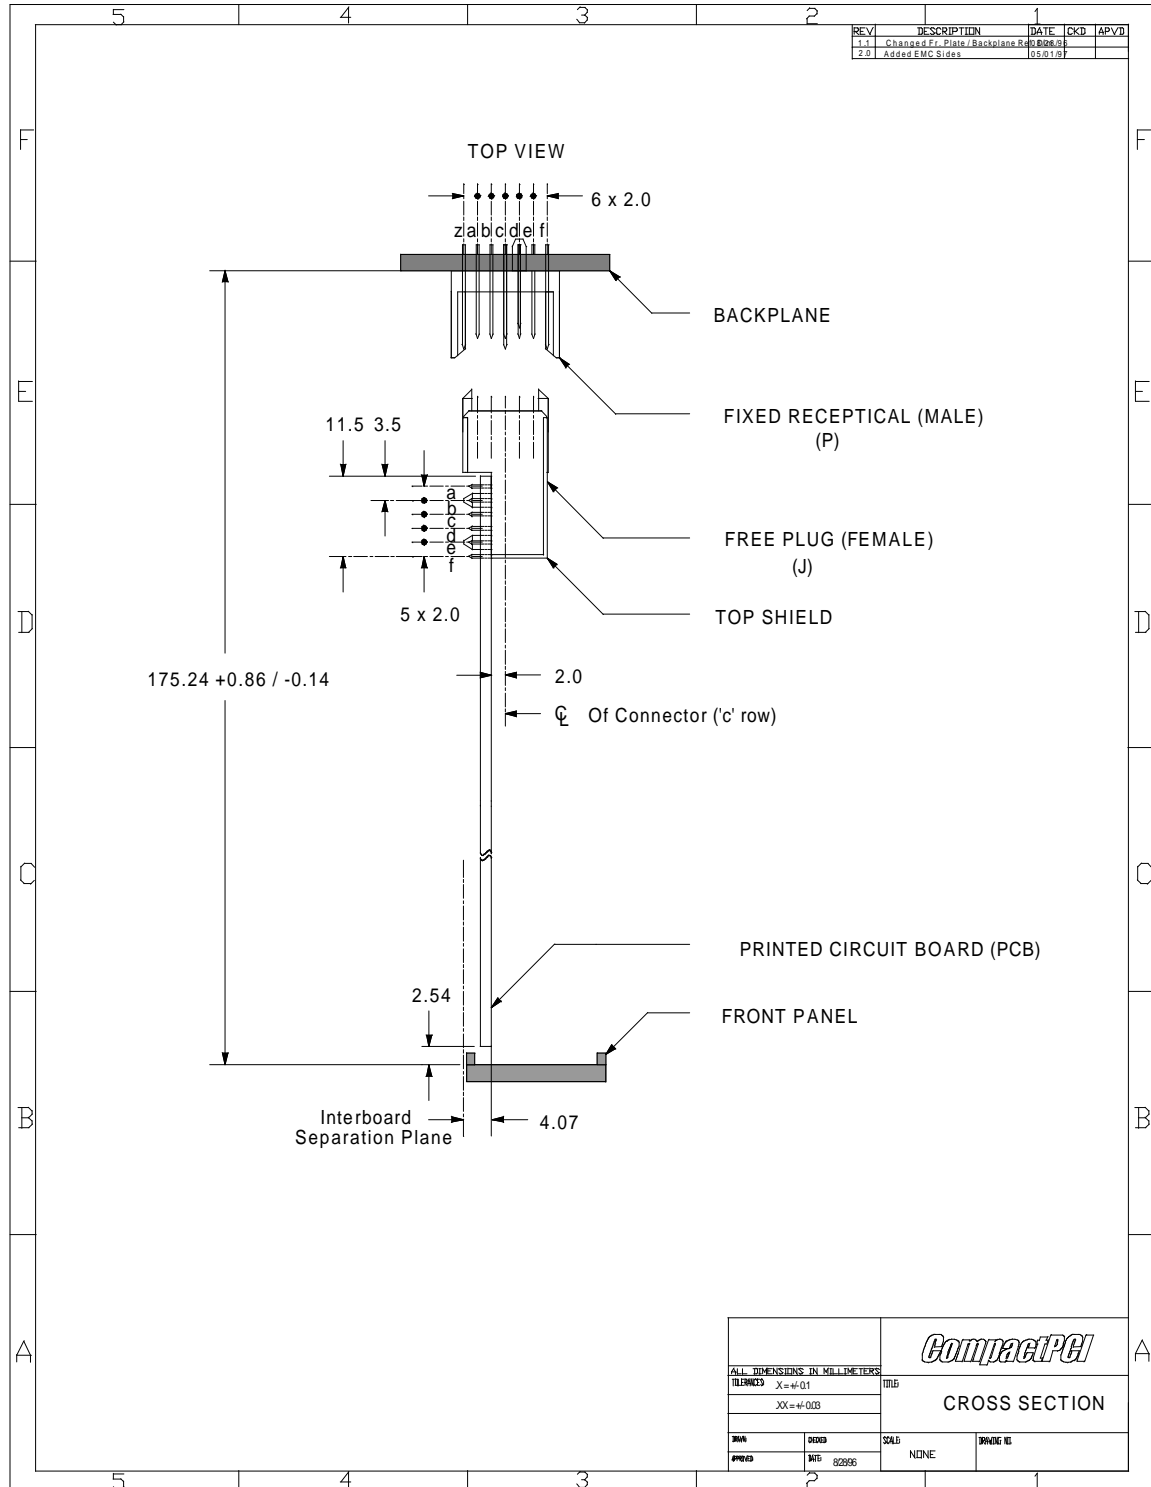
Cross Sectional Board, Connector, Backplane and Front Panel View.
